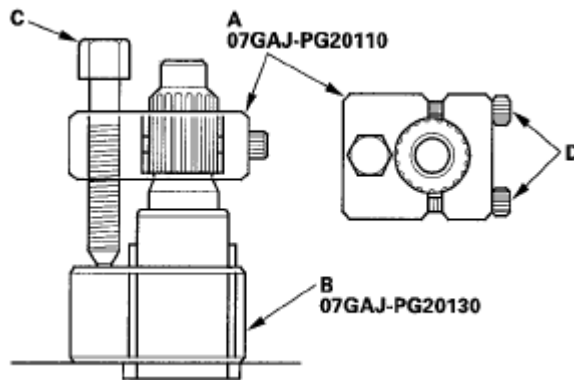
Identifying Mainshaft Holder, Mainshaft Base, Mainshaft Holder Bolt And Hex Bolts
